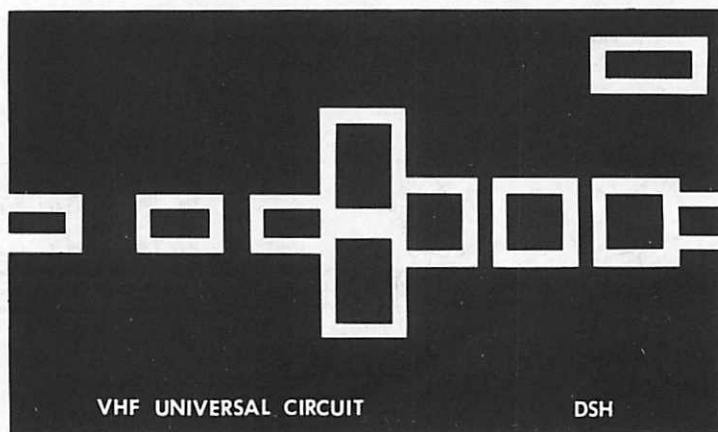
PRINTED CIRCUIT BOARD LAYOUT - 136 MHz TEST CIRCUIT
